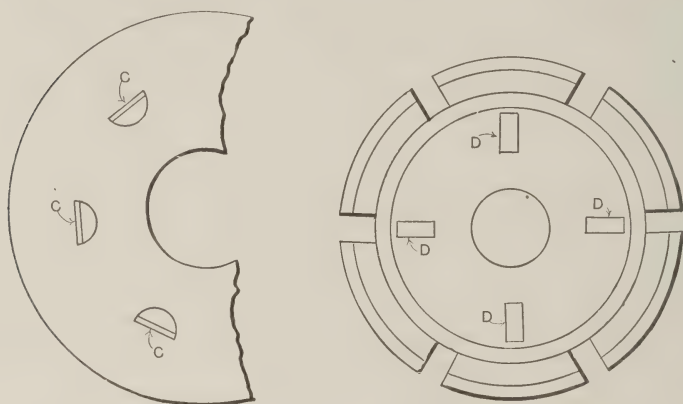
AND 3 SHOWING PROJECTIONS ON BRASS VALVE PLATE AND ON SPRING GUARD
